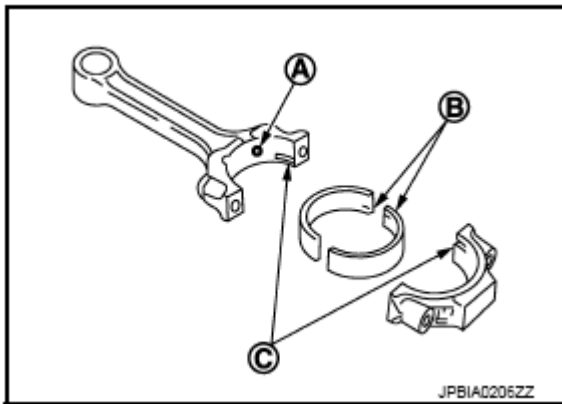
Identifying Connecting Rod Bearing Stopper Protrusion, Cutout And Oil Hole
